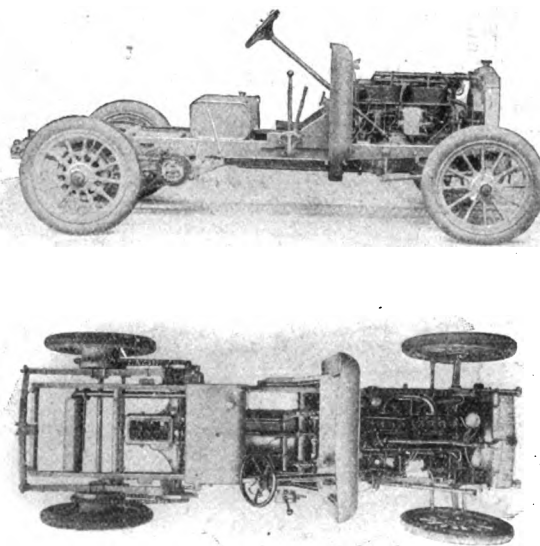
View of Portion of Daimler 1907 Chassis, showing Clutch Shaft with two Universal Joints marked X.
